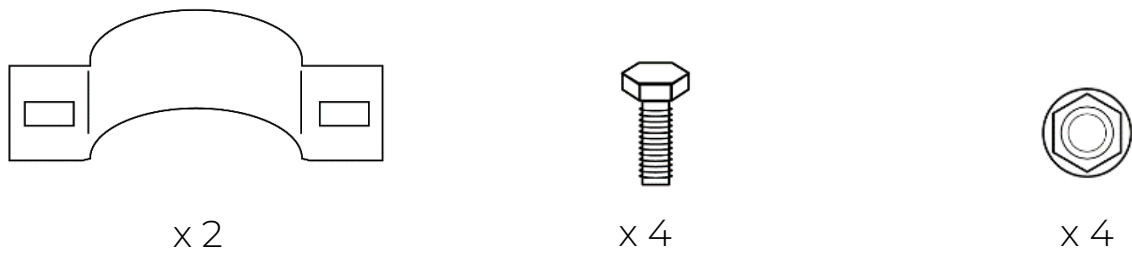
From left to right, brackets, M6x16 screw, M6 flange nut.
